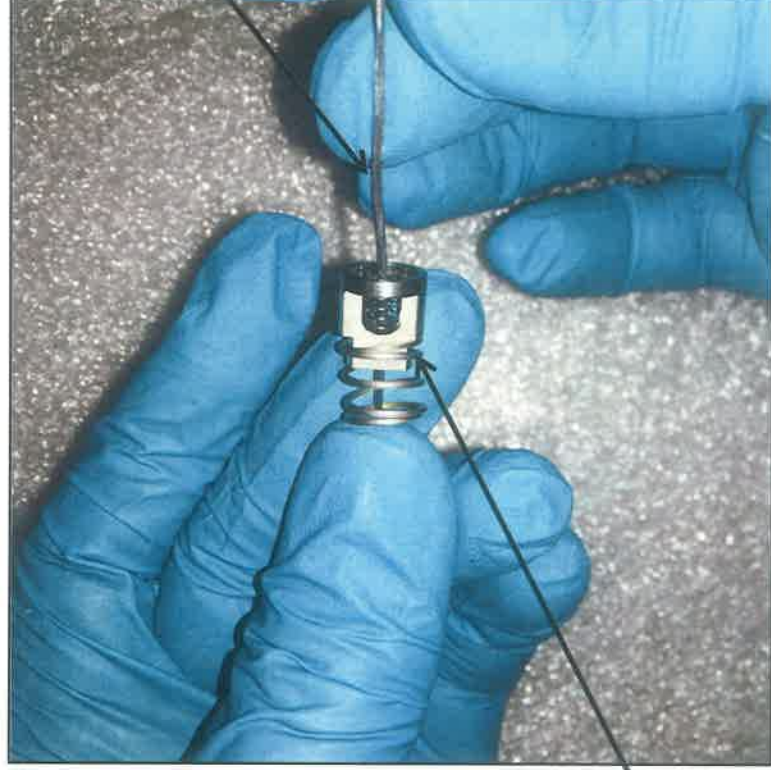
GAS SECTION REMOVAL (TUBES REMOVED FOR CLARITY)
